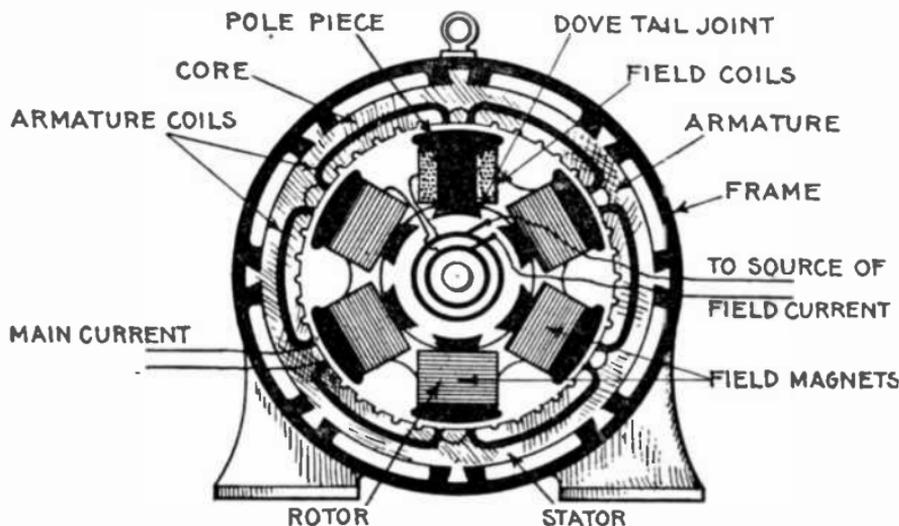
,176.—Diagram showing essential parts of a revolving field alternator and method of joining the parts in assembling.
